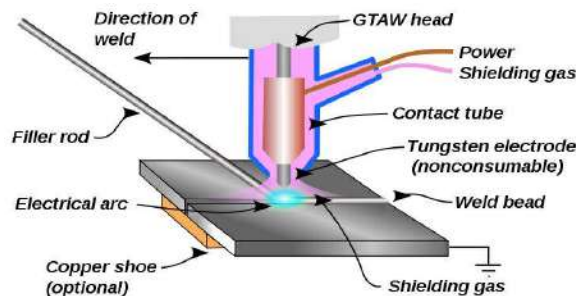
Gas tungsten arc welding process (Source: [12])
